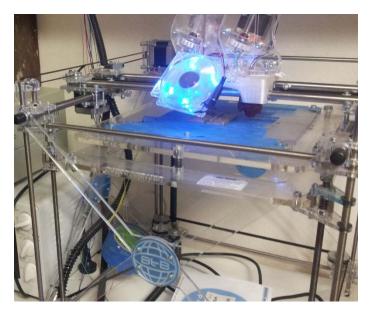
Rapman 3D printer, used in fabricating microphone enclosures
